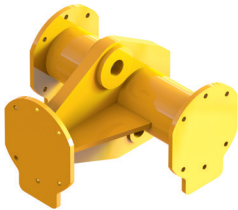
Typical CMOD 6-Point Spreader Frame Assembly
